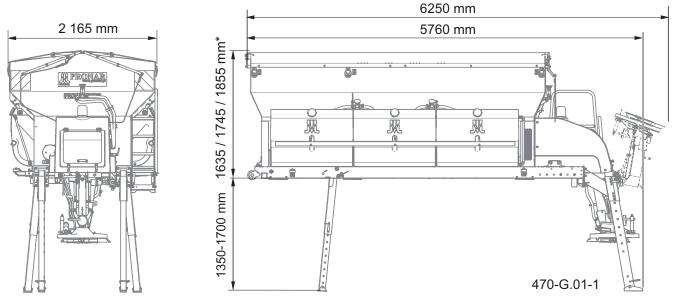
External dimensions of HPT70 spreader.\* - depending on the installed tank size
